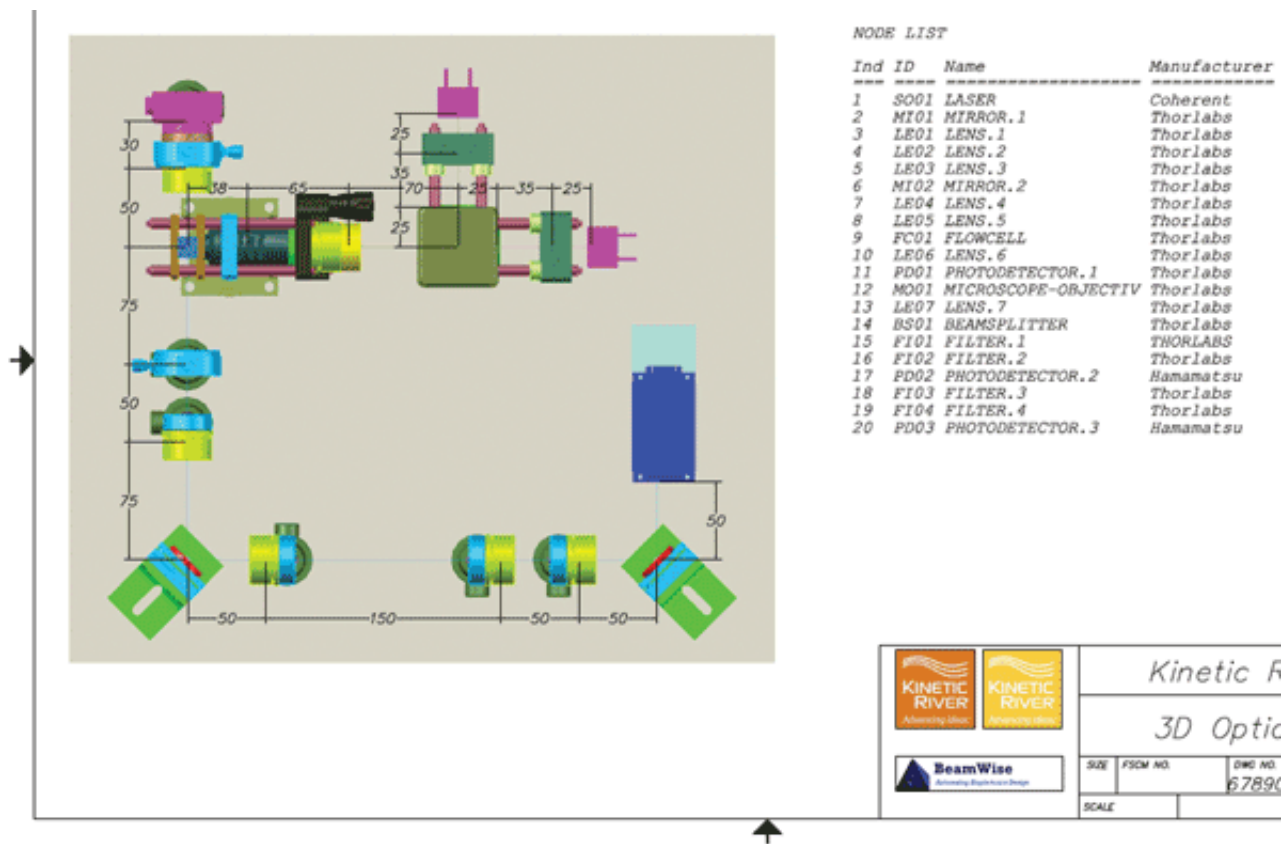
Detail of BeamWise 2-D dimensioned drawing and parts list.
